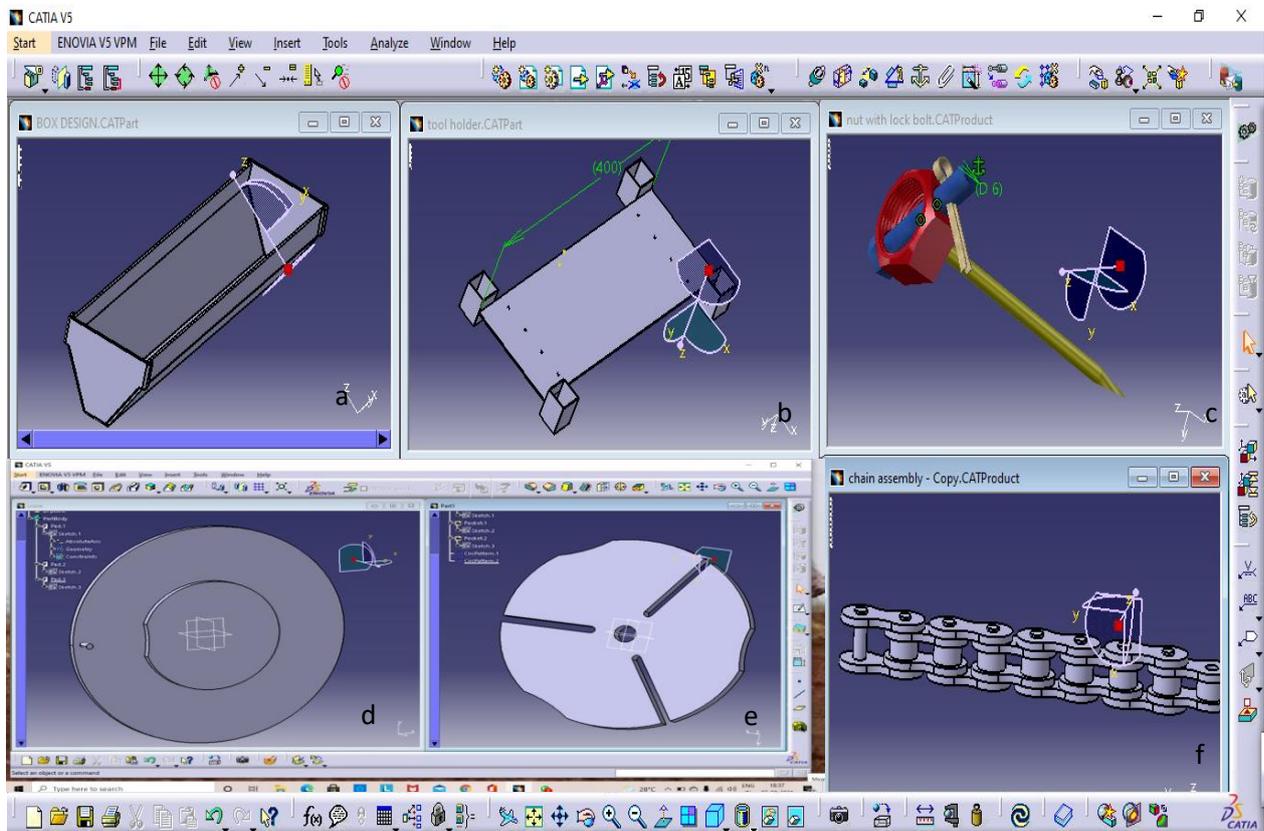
CAD models of parts a. Box, b. Tool holder, c. Perforation tool, d. Geneva crank wheel, e. Geneva wheel, f. Chain.
